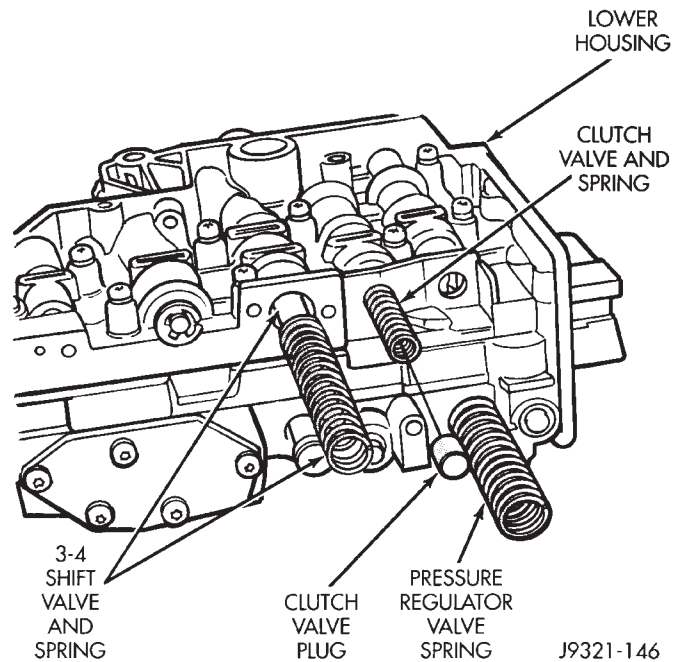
Clutch Valve And 3-4 Shift Valve Locations
